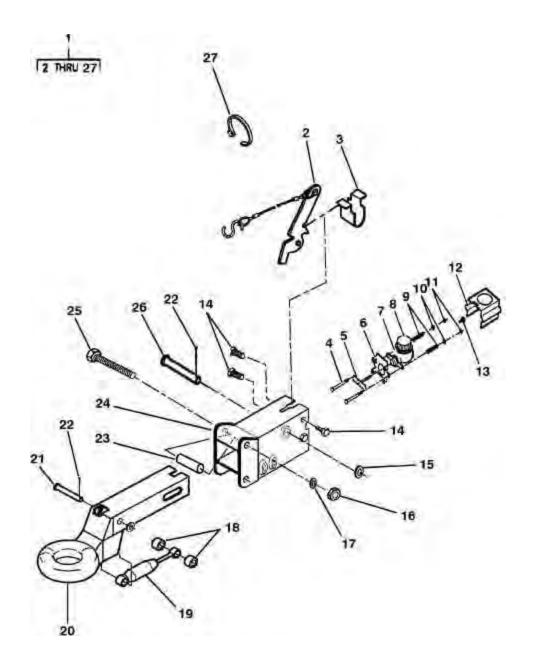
Brake Actuator Assembly (Sheet 1 of 2)
